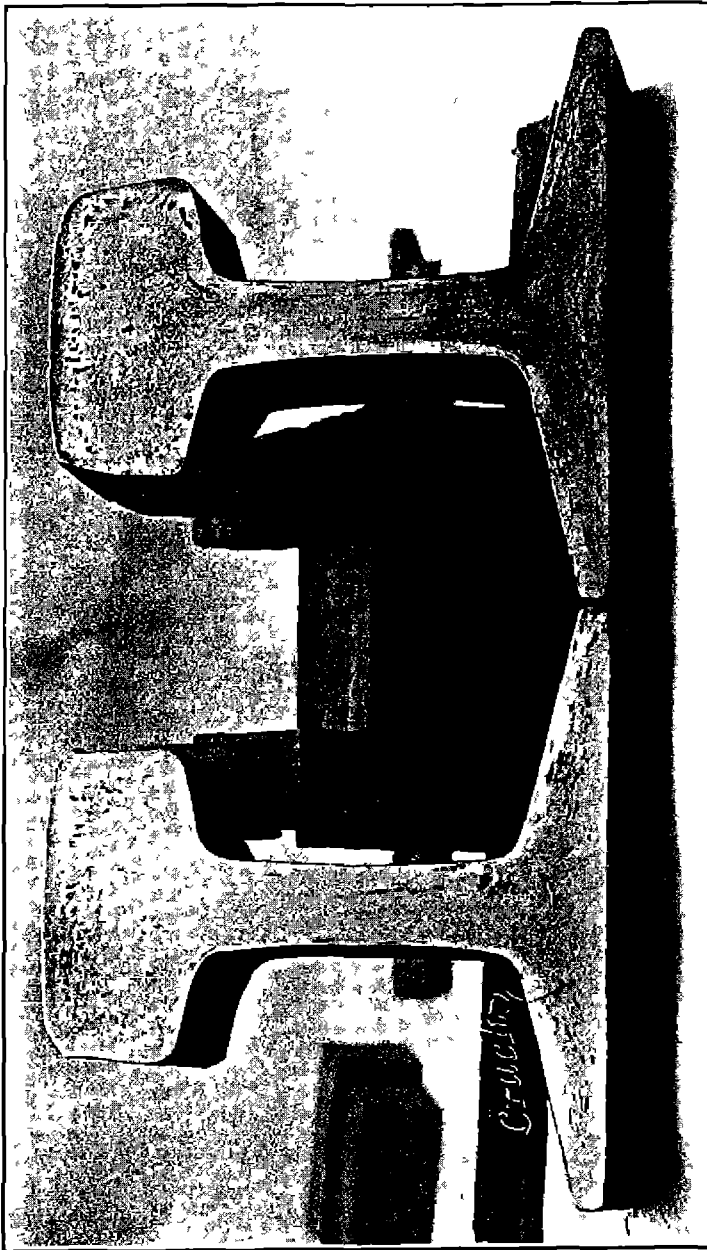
Etched cross sections, near opposite ends of rail. Showing crack in flange entering from upper side, which started at a seam in the steel.
